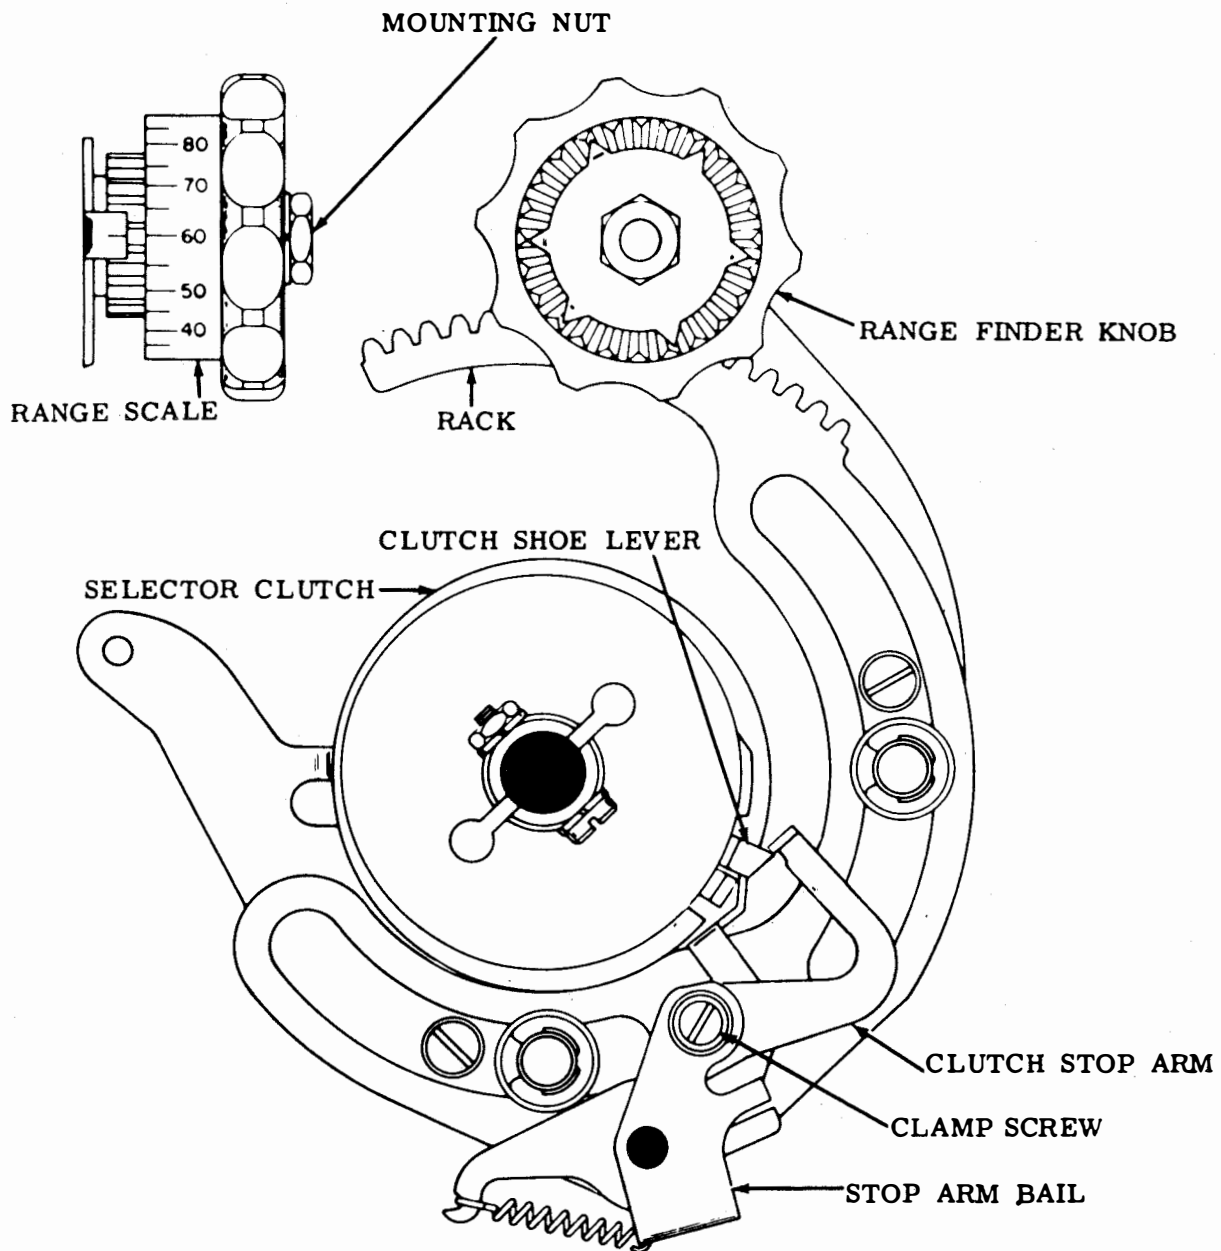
Range Finder Knob Phasing and Selector Clutch Stop Arm, Front View
